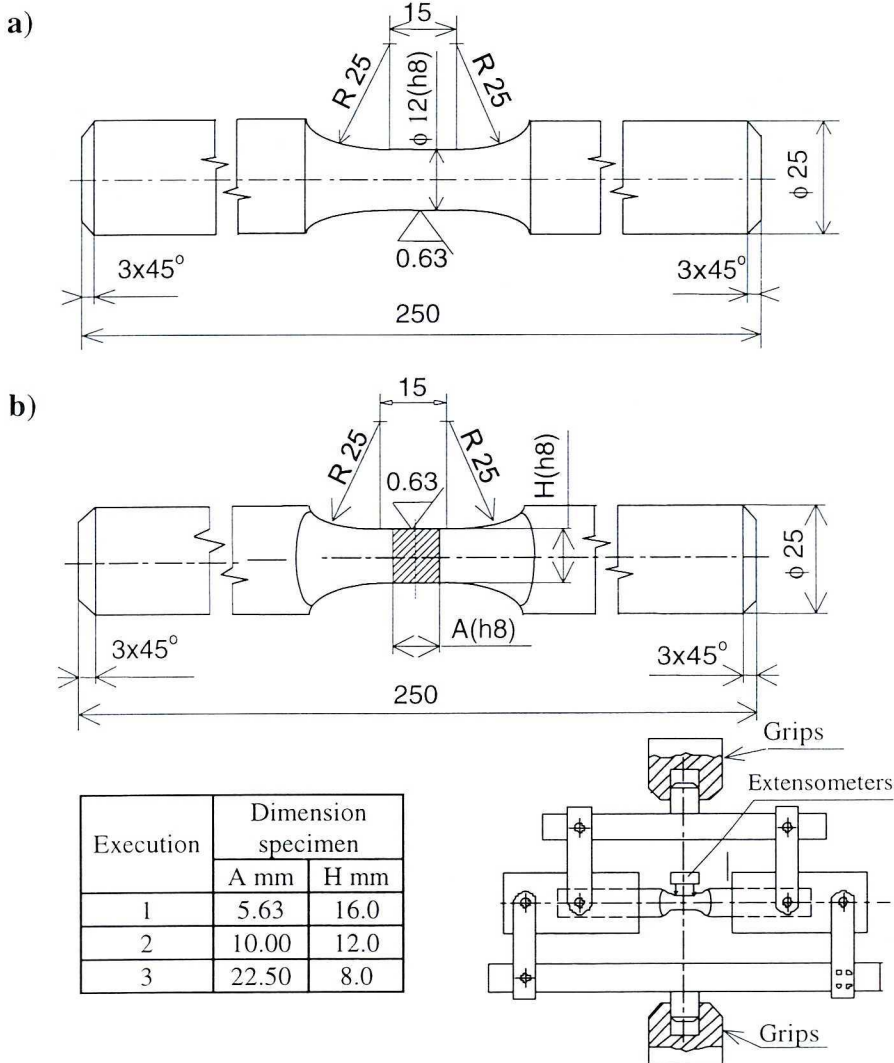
Specimen used during fatigue test: a) specimen for testing under uniaxial loading; b) specimen and testing device for plane bending
